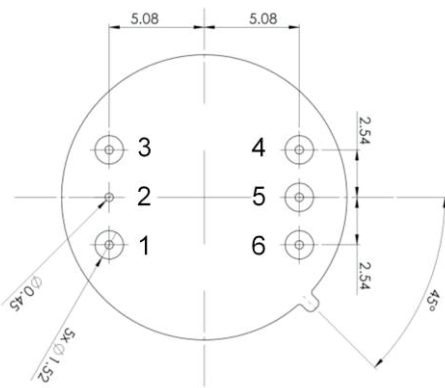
Bottom view of the 6 pin TO8 header with the pin connections
